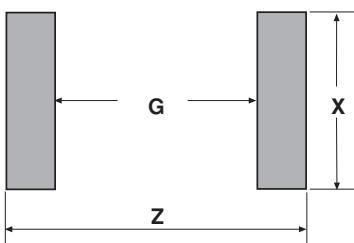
DIMENSIONS AND LAND PATTERN in inches (millimeters)
